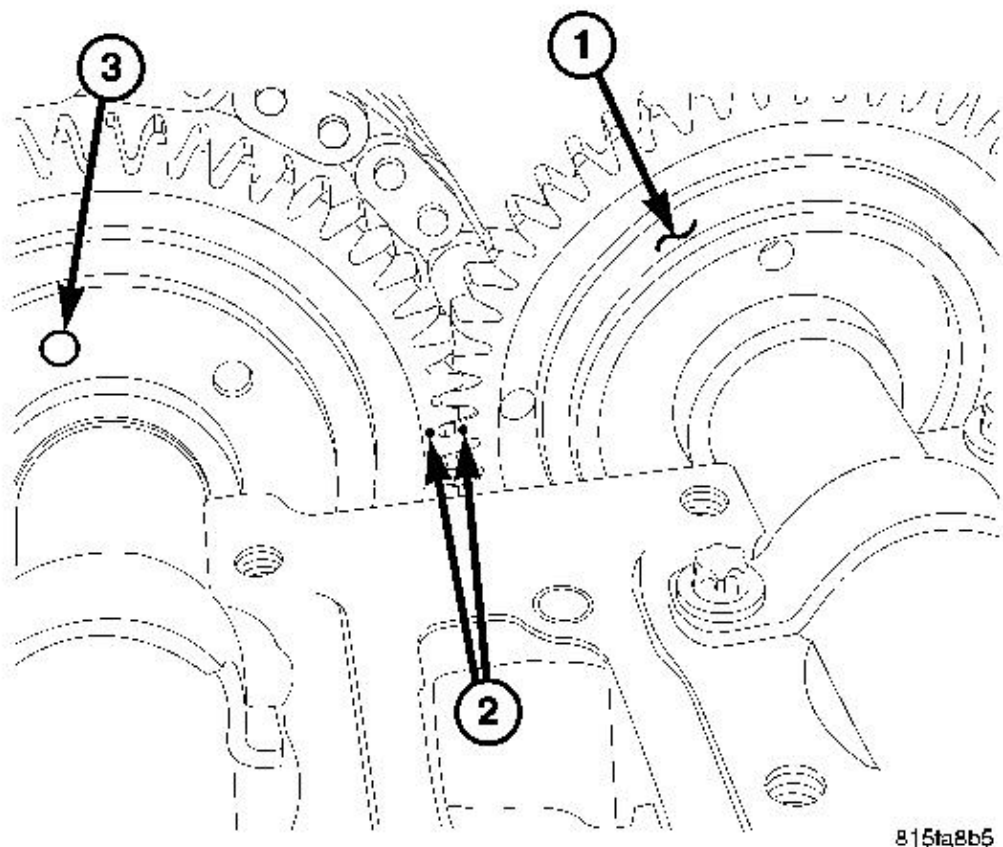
Left Exhaust Camshaft Drive Gear Alignment Dowel
